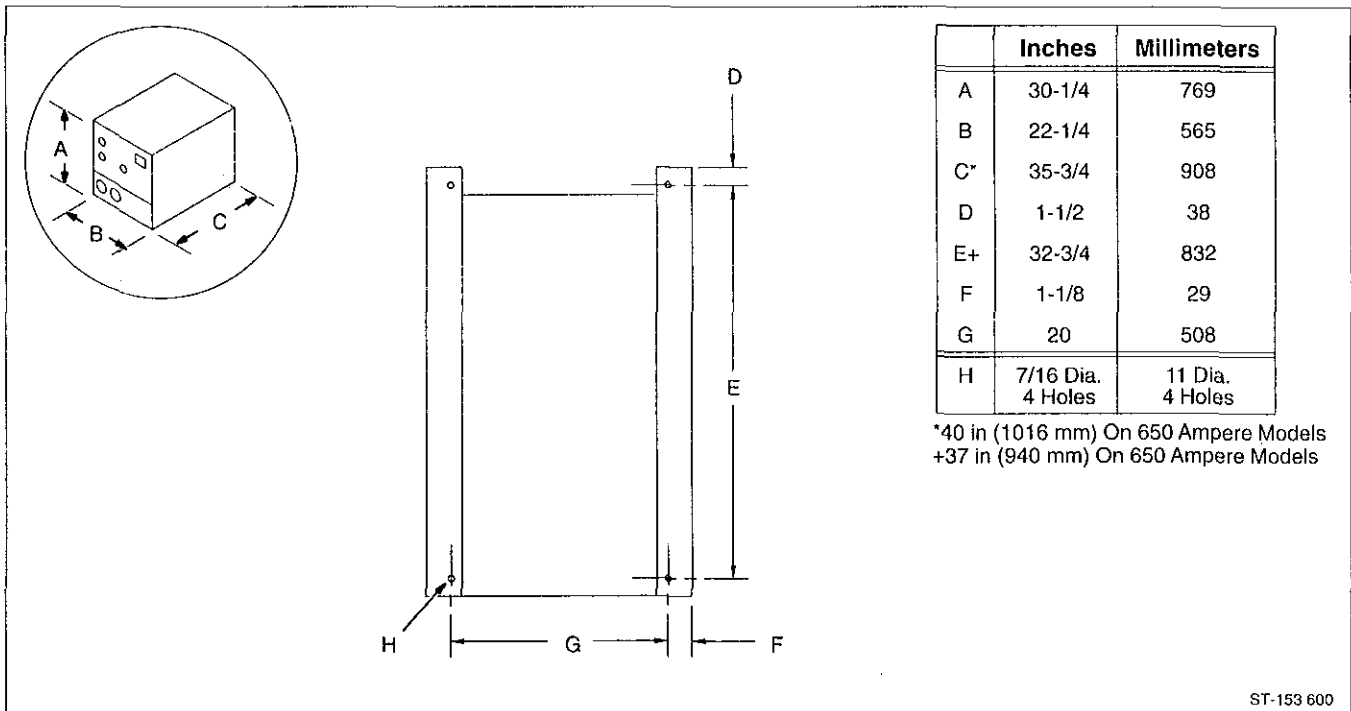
Overall Dimensions And Base Mounting Hole Layout
